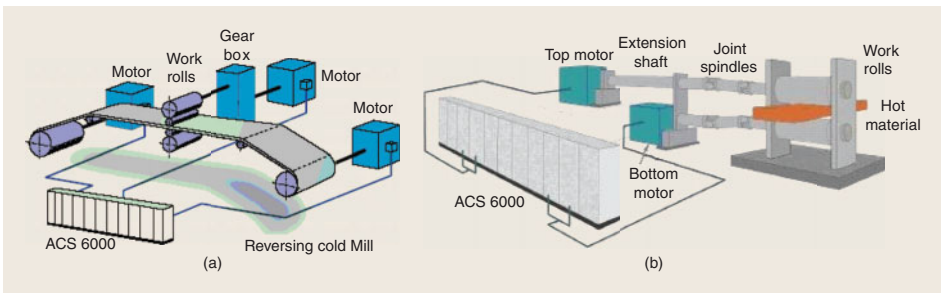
(a) Cold reversing mill with ACS6000 and (b) plate mill with ACS 6000 ABB Reprinted with permission from IEEE (Chattopadhyay 2010). (See page 543).
